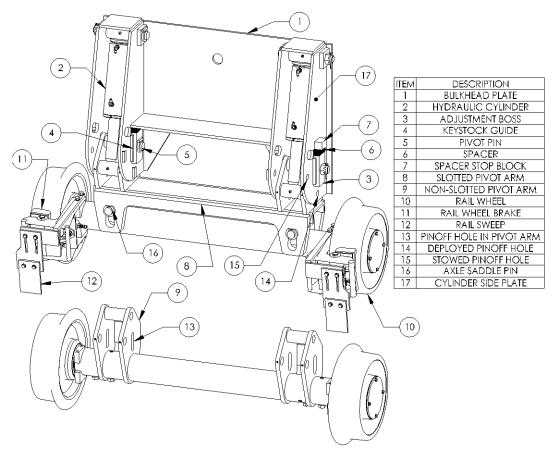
A Bulkhead Mounted Railgear Parts
